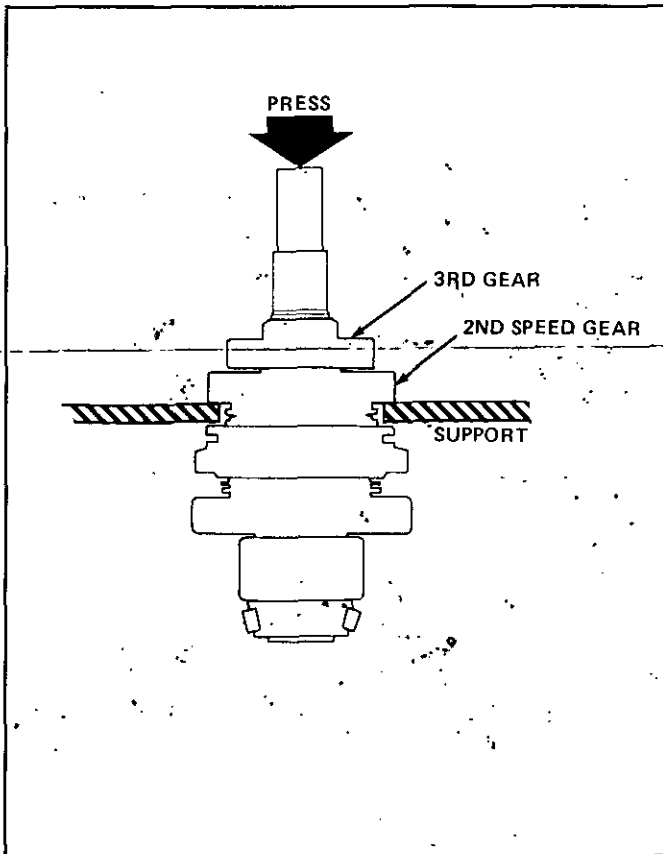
Removing 3rd Gear and 2nd Gear (Output)
